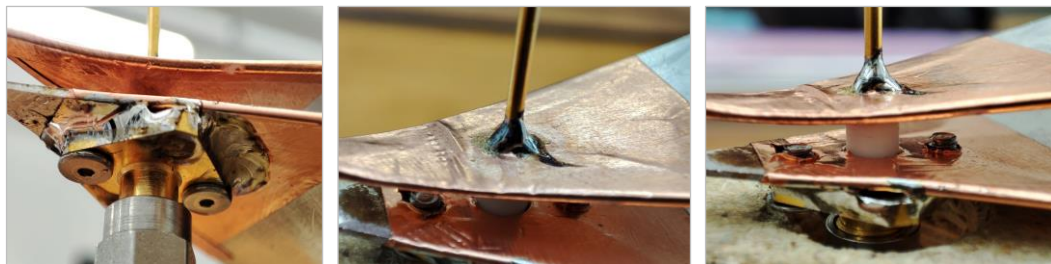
Connector bolted and soldered onto ground plane (left). Top view showing connector soldered onto top plate using copper tape and aluminium solder (centre). Side view of soldered SMA panel mount connector with 3 mm vertical spacing connecting top plate and ground plane (right).
